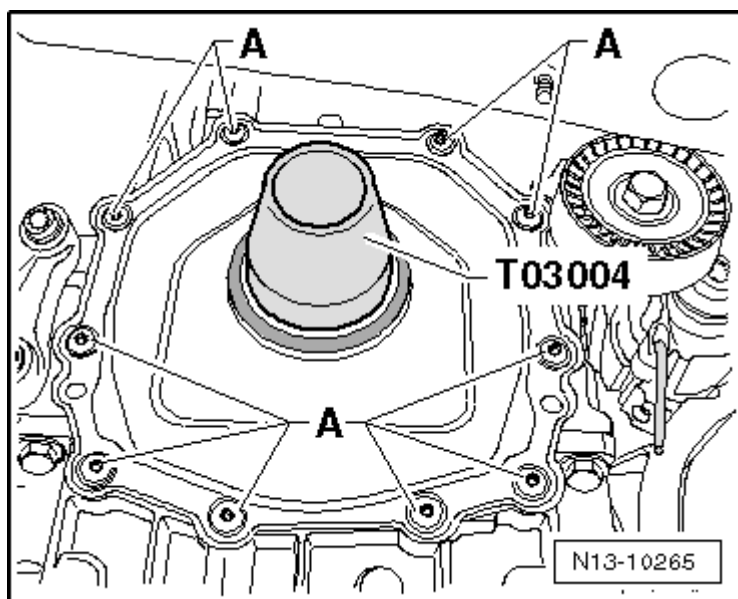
Inserting Sealing Flange Using Assembly Sleeve T03004 On Crankshaft Journals
